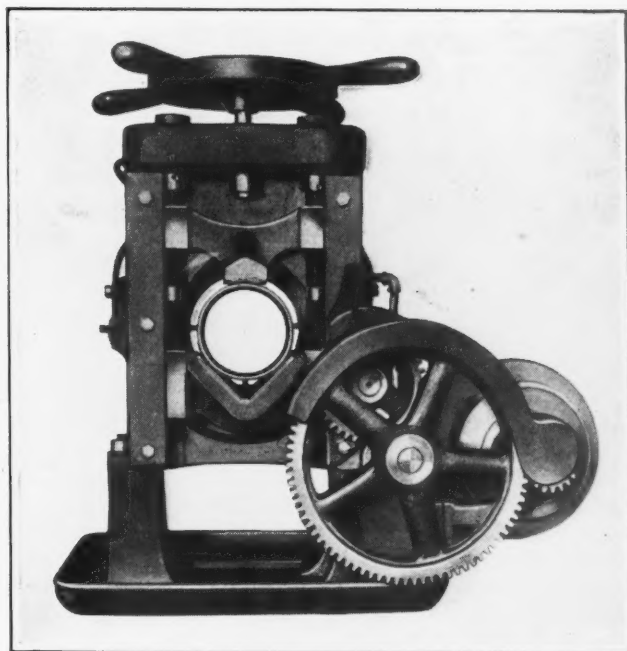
Machine shown in Fig. 1, but with Vise Jaws gripping Large Pipe and still maintaining Alignment with the Threading Die
